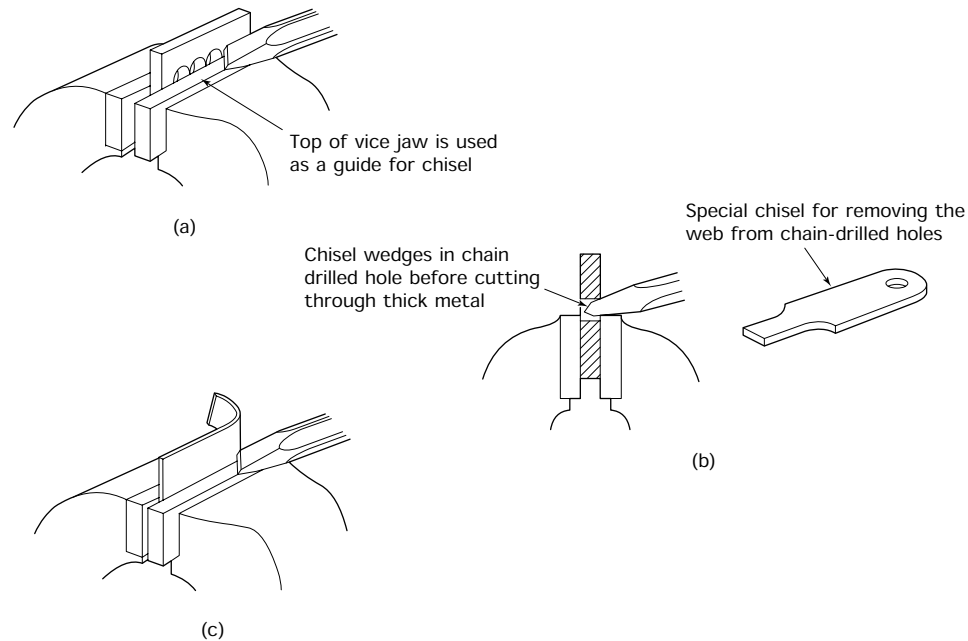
(a) Use of the chisel to remove surplus material; (b) problem when chiselling through thick metal – a chisel made from an old piece of HSS power hacksaw blade (right) will not wedge; note the cutting edge is ground off square; not a chisel edge; (c) cutting thin sheet metal using a cold chisel
